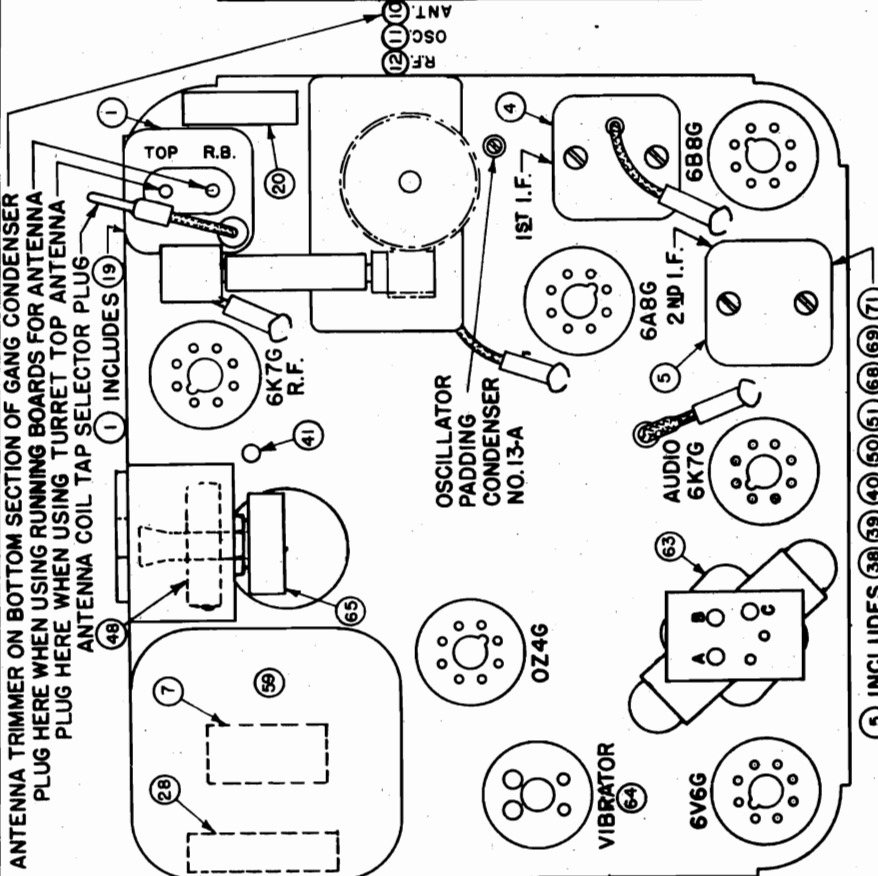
PARTS LAYOUT-BOTTOM VIEW (24)
